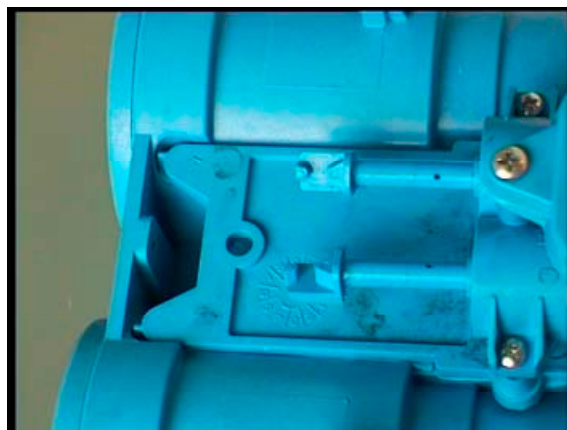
The final part of each stem is flat and has two centering marks. Place the cam edge on the space between those marks. Make sure the stems are directed inside so as to house the cam edge in the best way possible.
